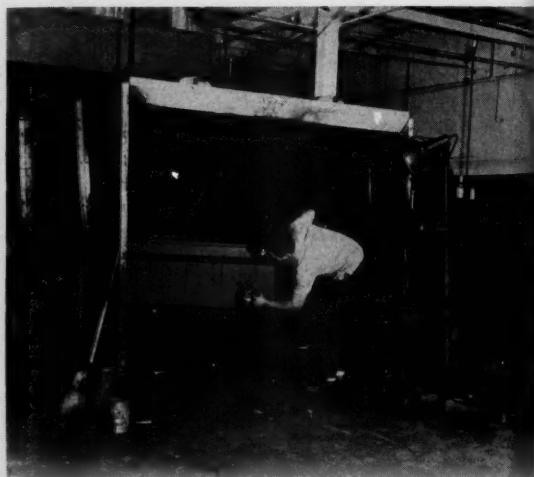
The slot conveyor brings the body to sections of roller conveyors on which pieces are given their final finishing operations. They are taken from here again by slot conveyors up an incline.
